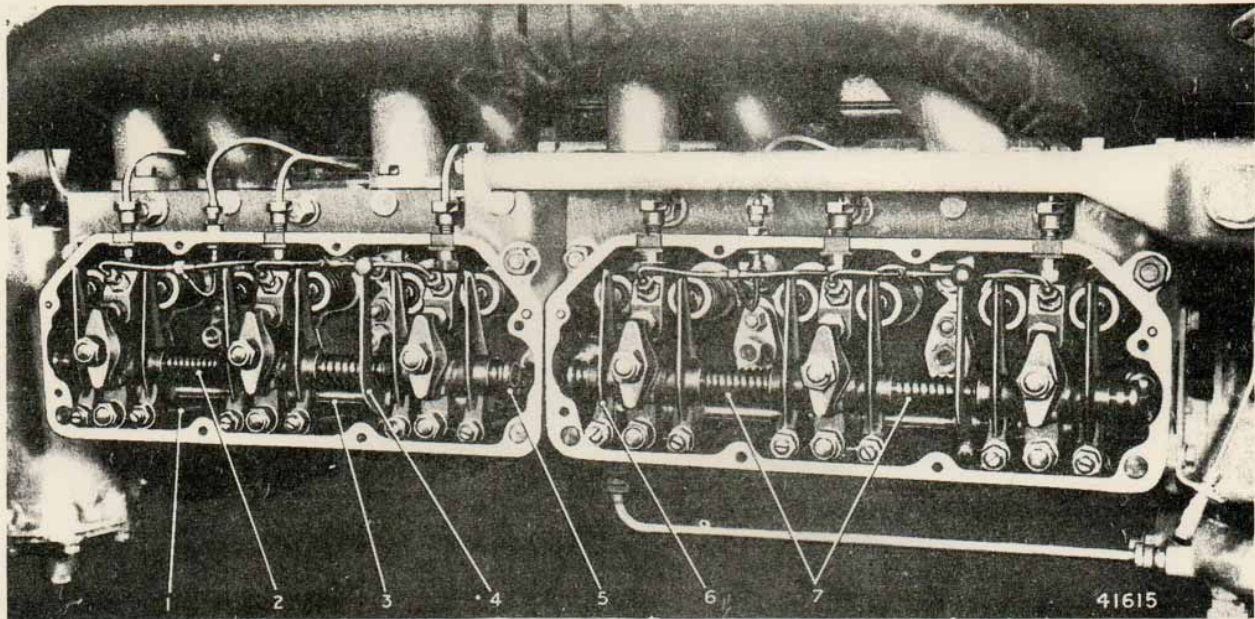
CYLINDER HEADS IN POSITION SHOWING VALVE GEAR.
